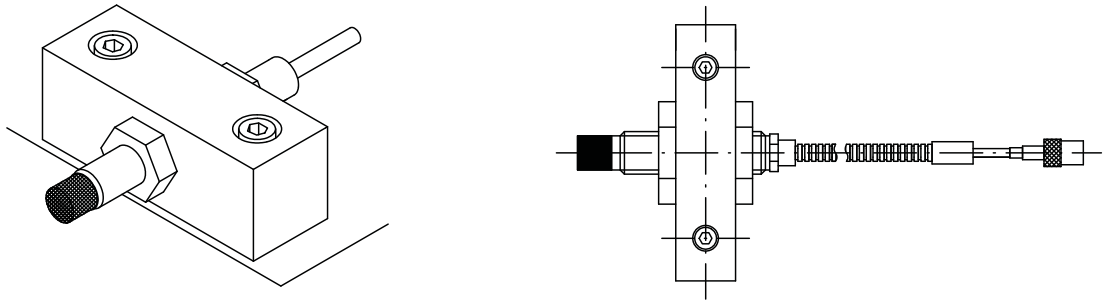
Mounting support (drilled but not threaded) requiring two retaining nuts
